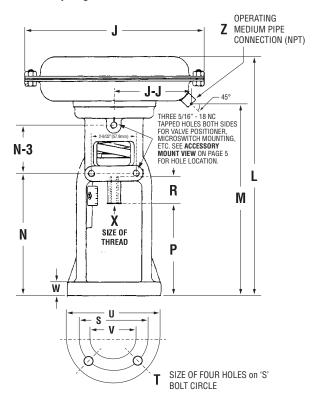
Direct Acting Actuator and Hand Operating Device dimensions
